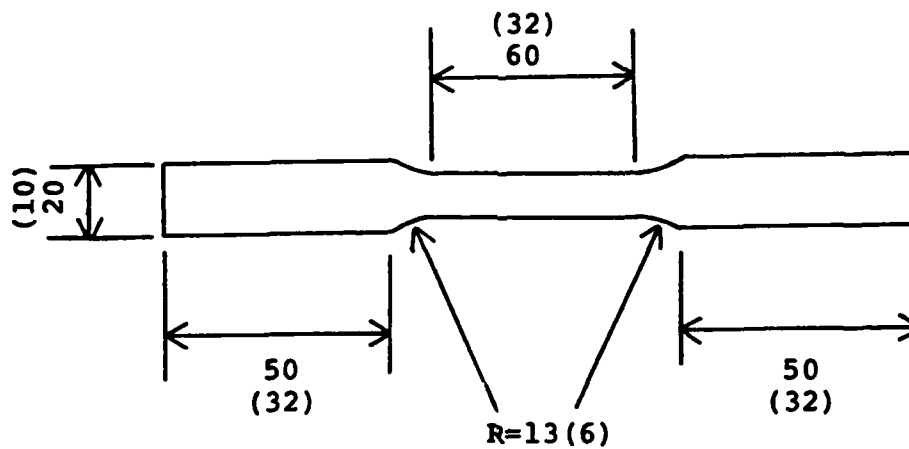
Tensile test specimen. Numbers in parentheses are dimensions of Subsize specimen. Non-parenthesized numbers are dimensions of Standard specimen. All dimensions shown are in millimeters. R is the radius of the fillet.
